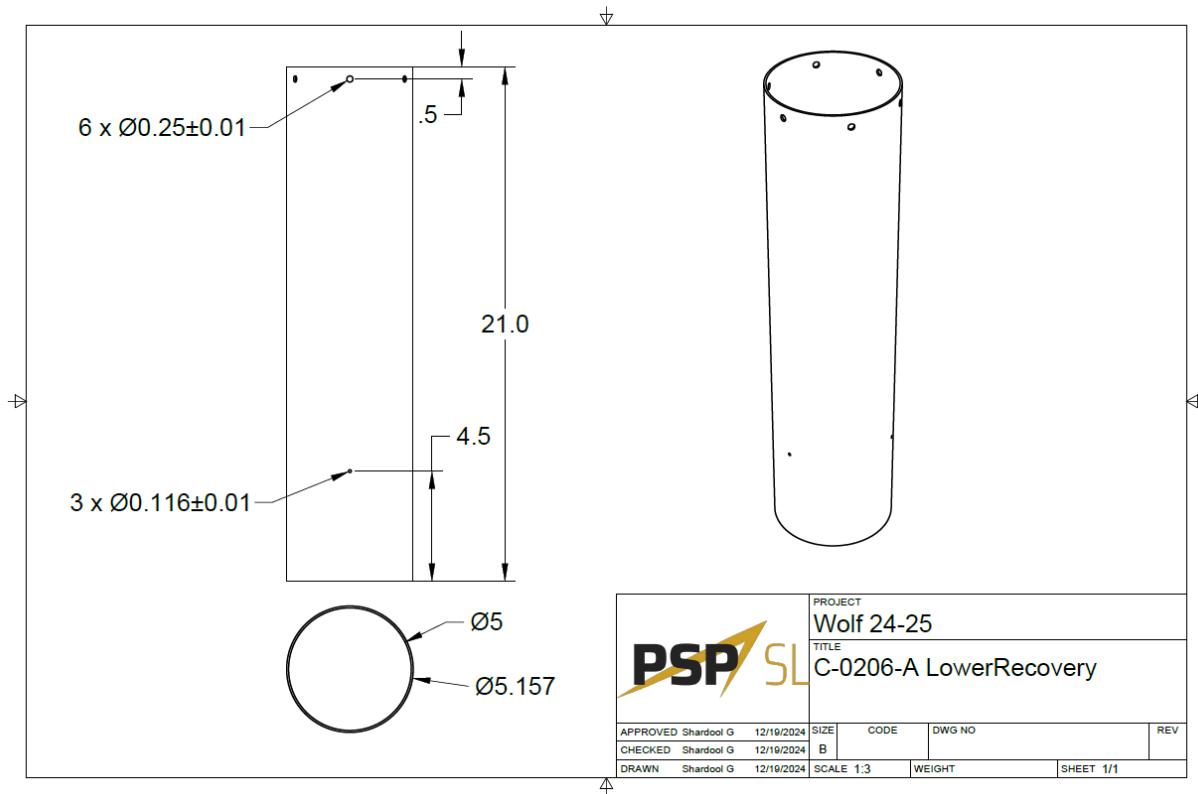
Lower Recovery Airframe Technical Drawing
